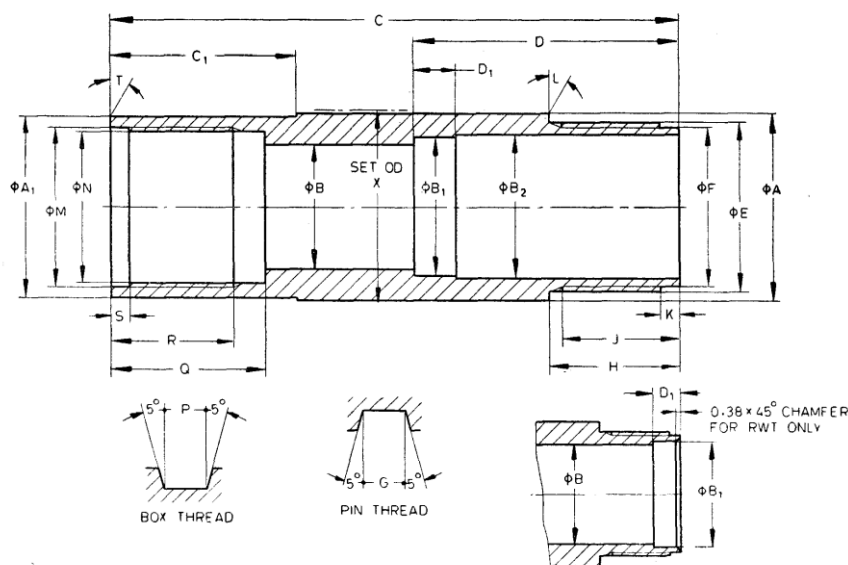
'WT' DESIGN DOUBLE TUBE CORE BARREL — REAMING SHELL
